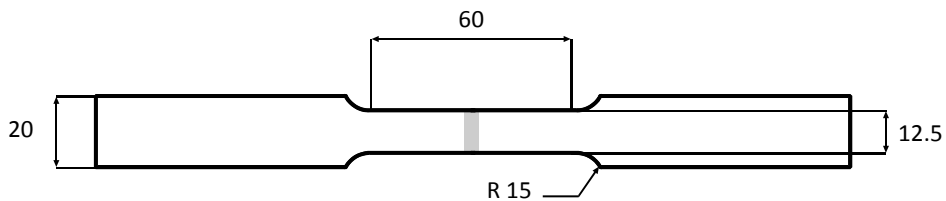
Tensile specimen according to AWS B4.0 specification; all dimensions in millimeters
